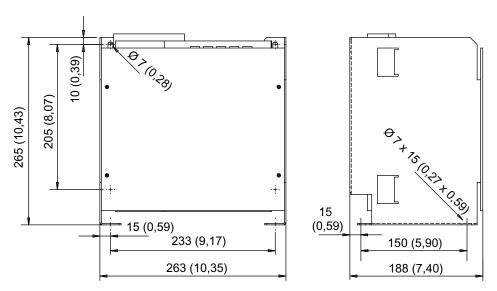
Dimension drawing of the voltage peak limiter, type 1
